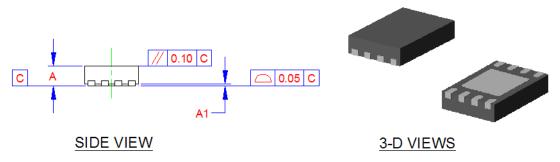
EMC1412 2mm x 3mm TDFN Package Drawing
